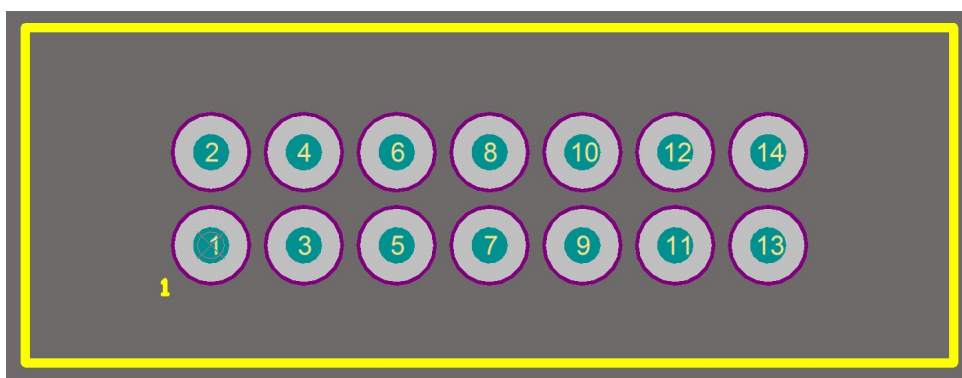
MSP-FET430UIF female connector PCB footprint.
